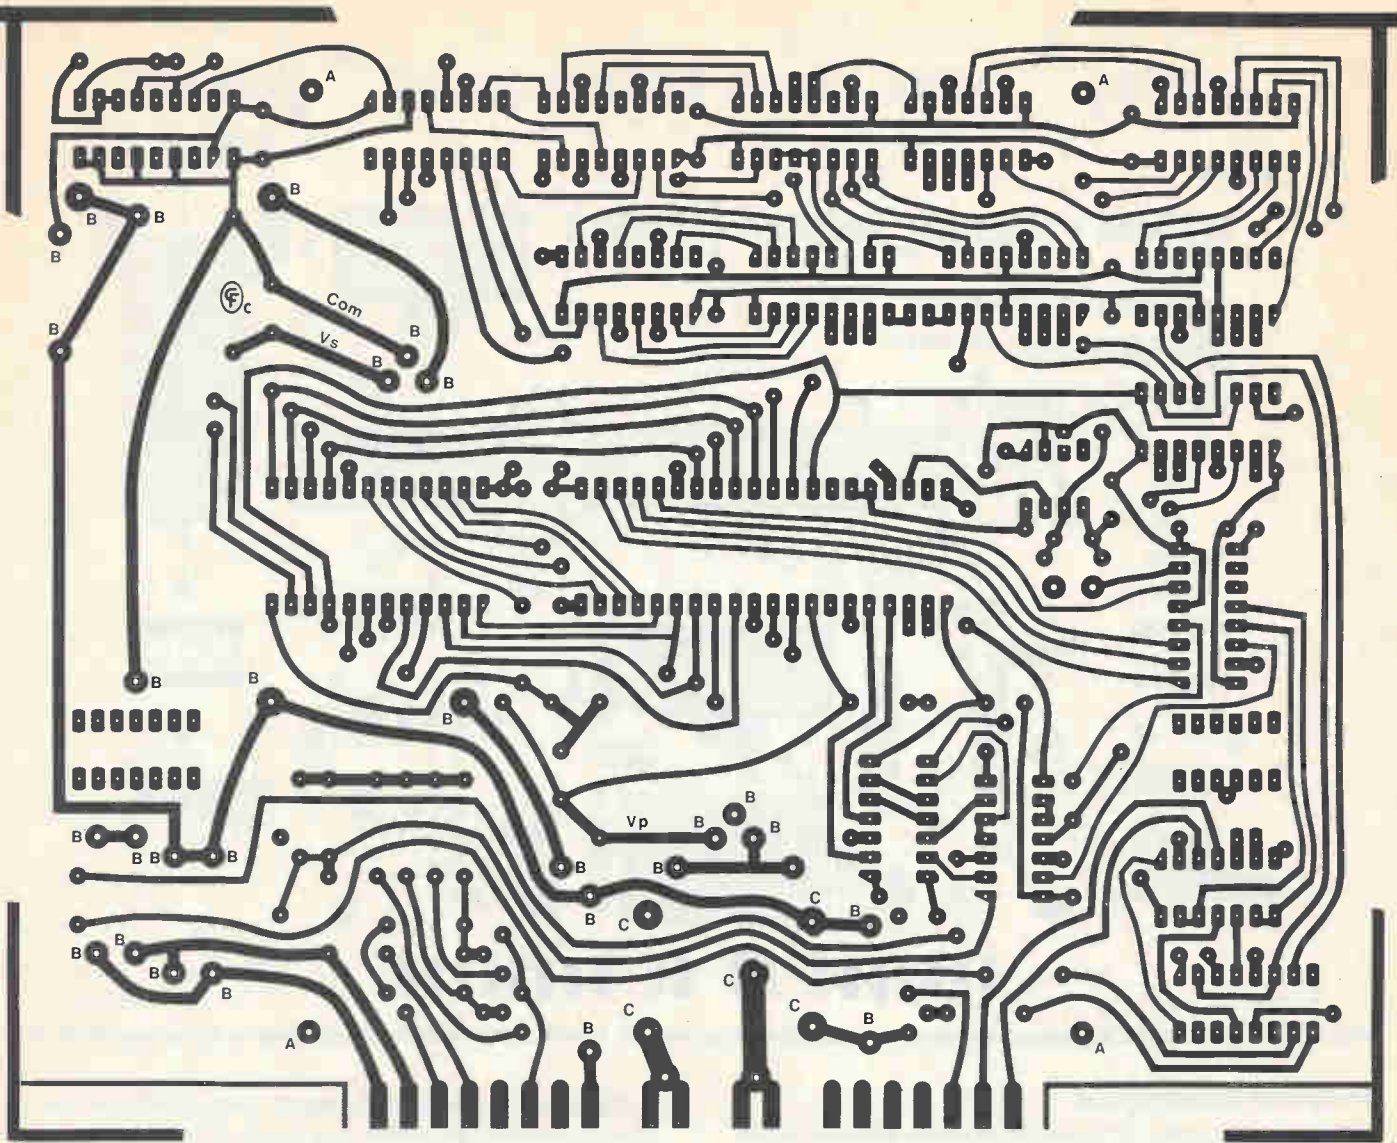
MICROPROCESSOR printed-circuit board rear foil pattern shown same size.
